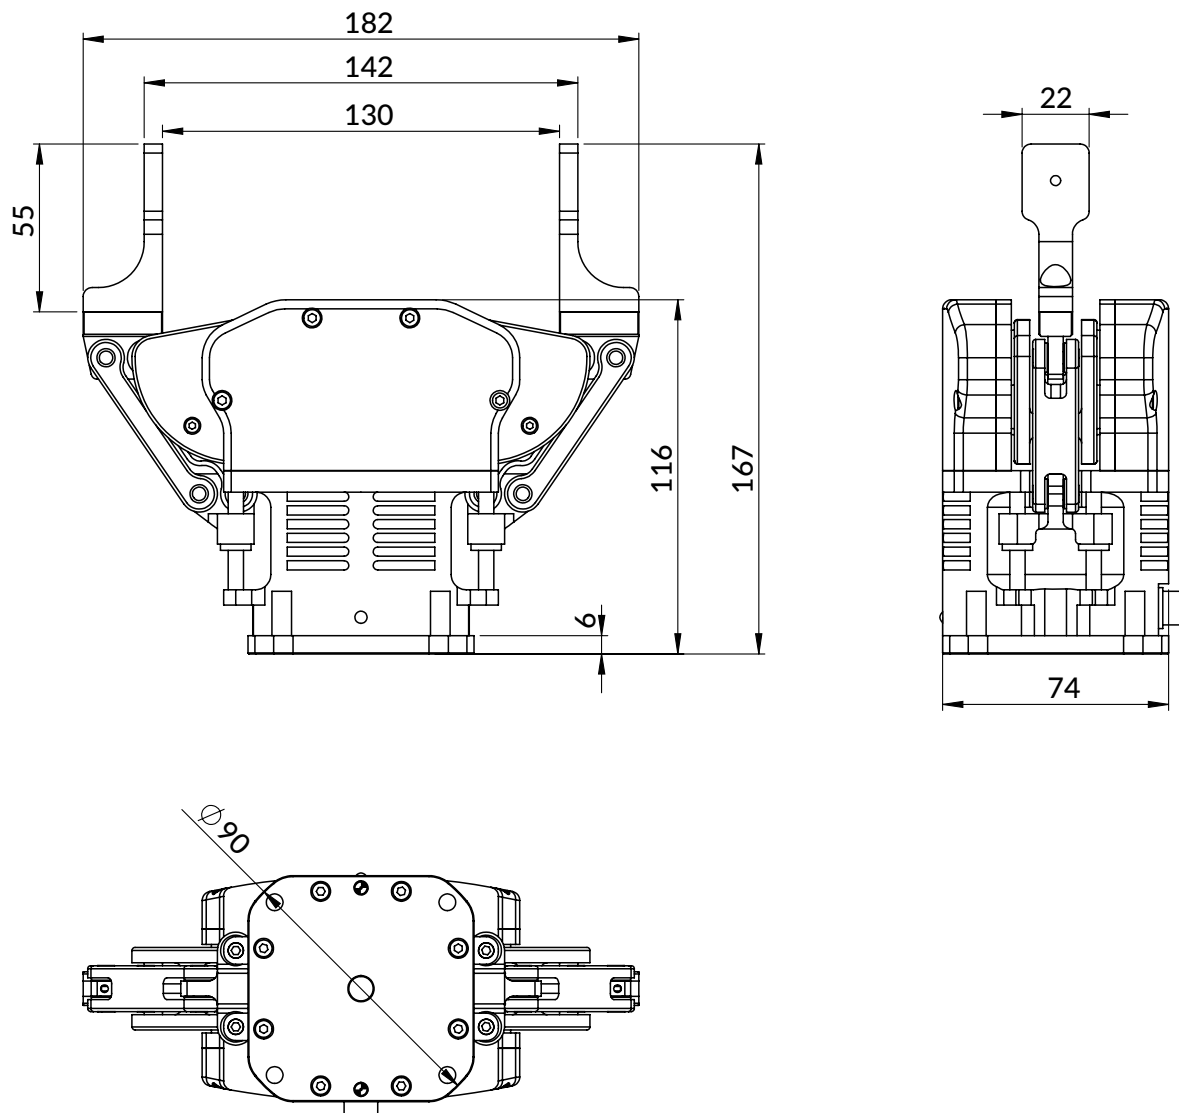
SusGrip 2F Mechanical Dimensions (Opening)
